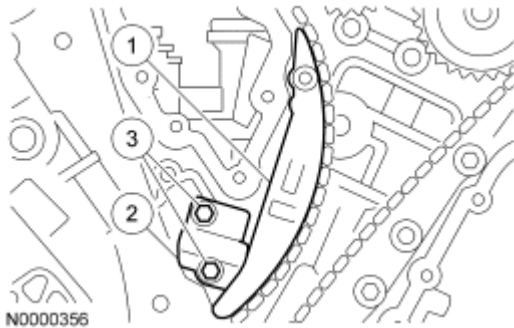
Identifying Timing Chain Tensioner Arm & Bolts
